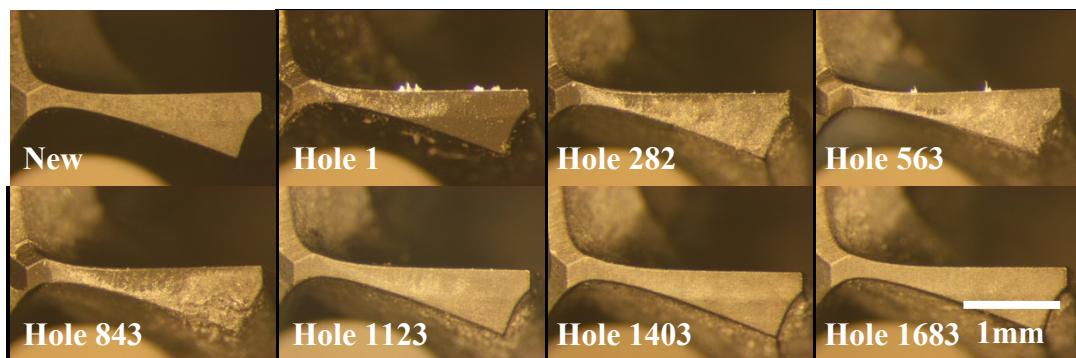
Tool wear micrographs of CVD diamond coated drill under 3bar cutting fluid, 130m/min cutting speed (Test 3)
